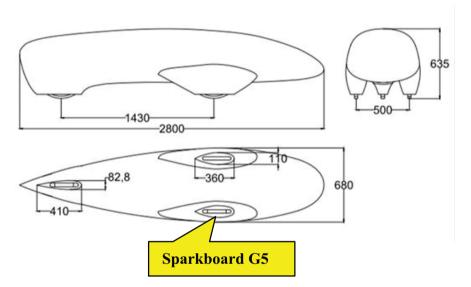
Front, Side and Bottom View of Si Pitung G5.
